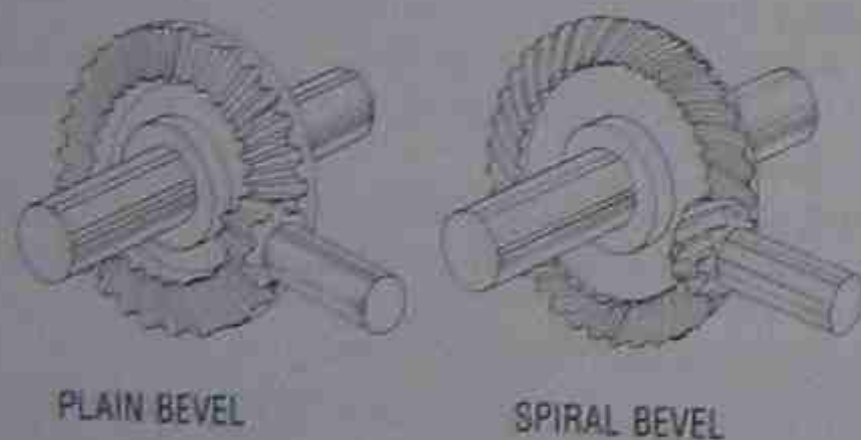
Bevel gear teeth may be plain or spiral.
